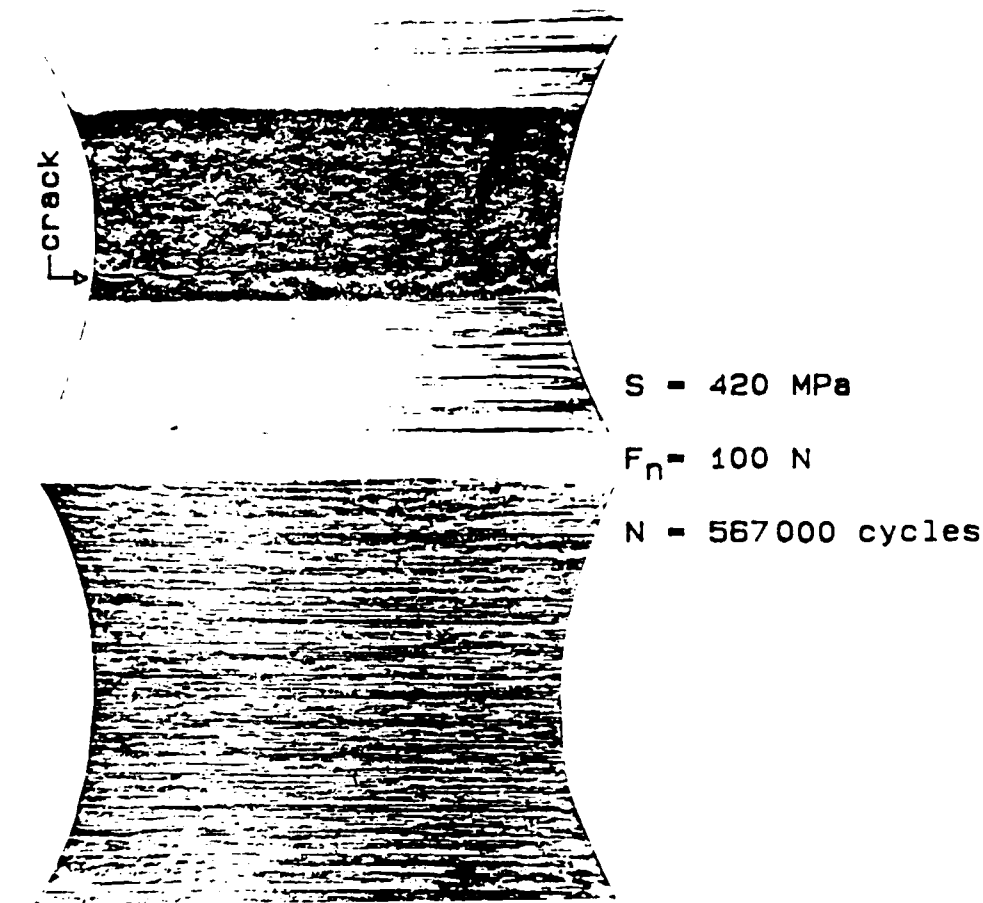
Fretting fatigue initiated crack within the fretting mark of a perpendicular to the sliding direction polished 480 HV specimen. Roughness 0.25 μ m CLA, specimen number 464.
